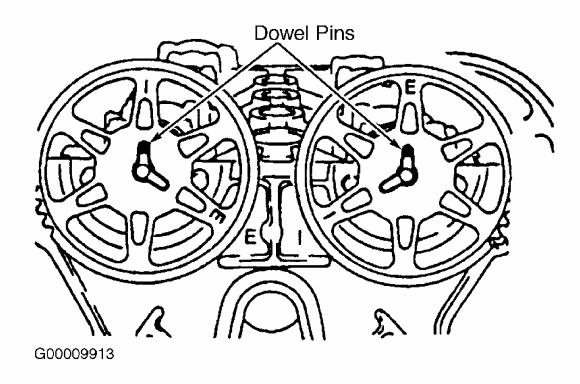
Installing Camshaft Sprockets (Miata) Courtesy of MAZDA MOTOR CORP.
